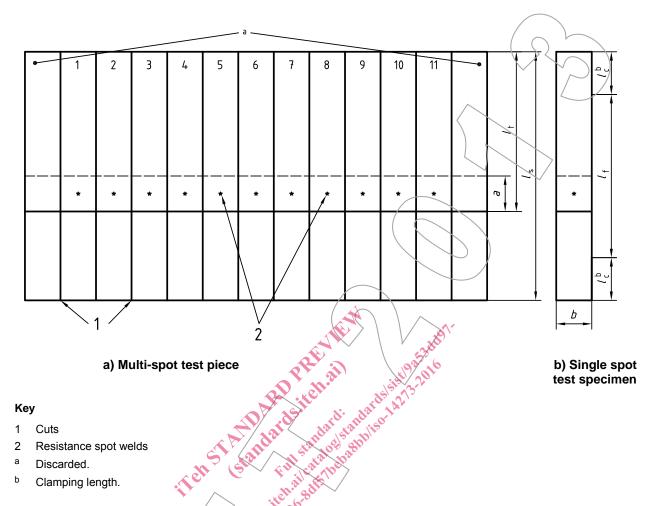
Test specimen dimensions and sampling position for multi- and single spot welded test pieces
